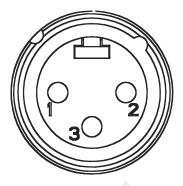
Half-coded male cable connector, mates with a standard female chassis connector as well as with a fully coded chassis connector
